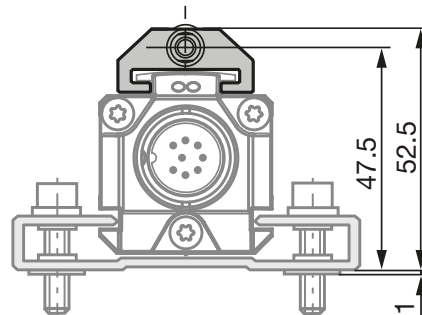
Dimensions and distances with BTL5-T-2814-1S magnet
